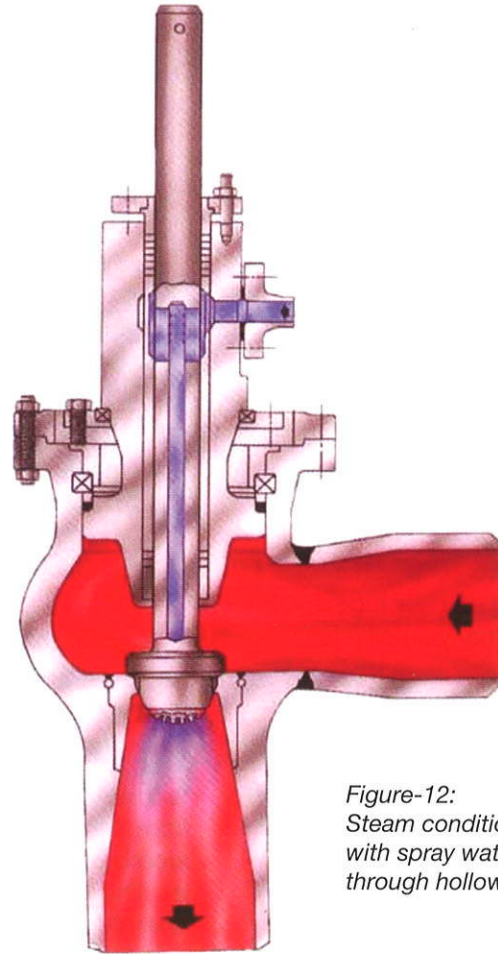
Steam conditioning valve with spray water injection through hollow stem
